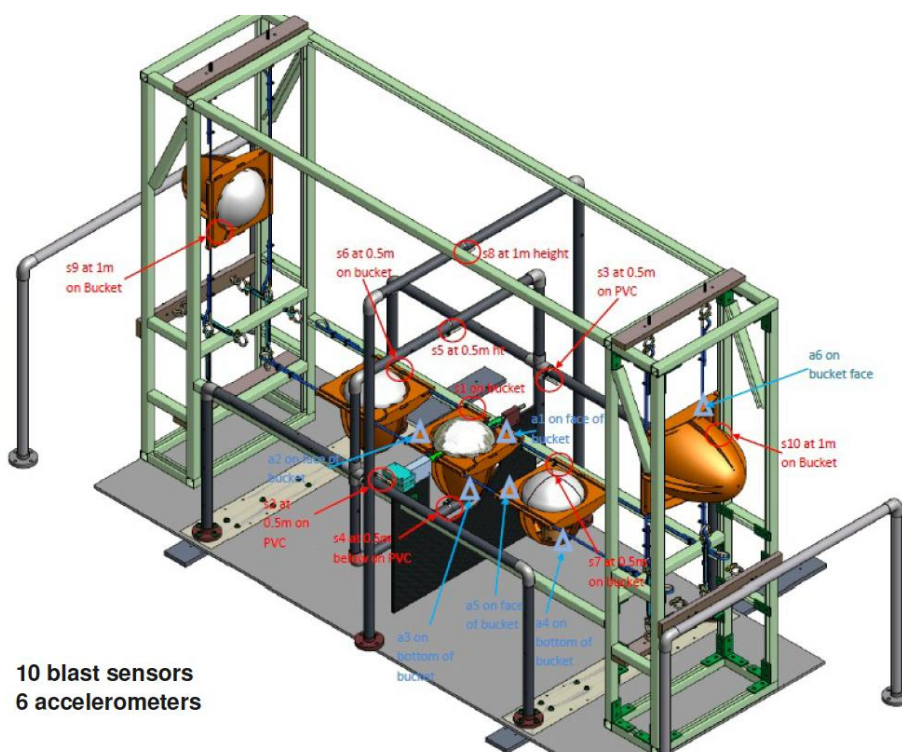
The 5 PMT assembly using PA housing design and wire rope assembly in horizontal configuration. The central tube will be imploded using a hydraulic poker system as for Phase-I.
